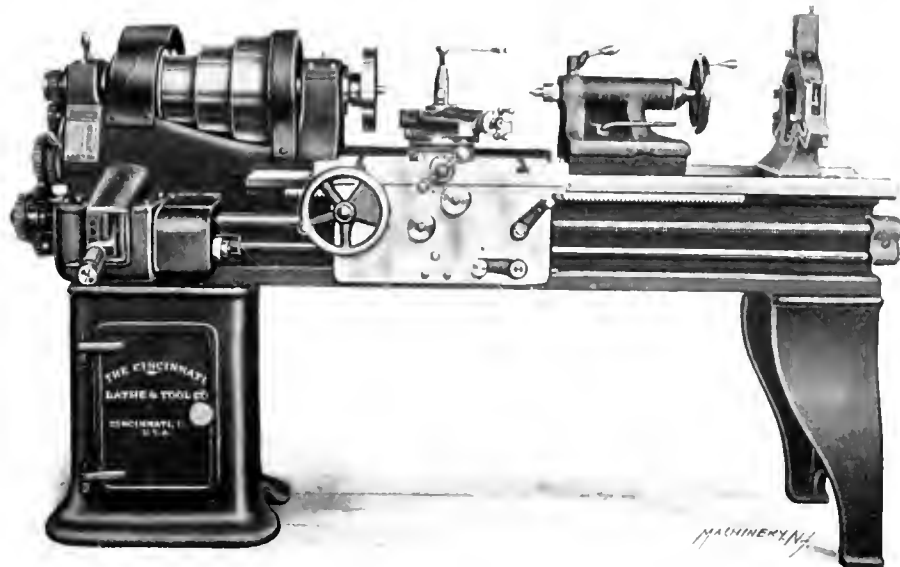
Cincinnati Lathe provided with Improved Quick Feed Change Device.
